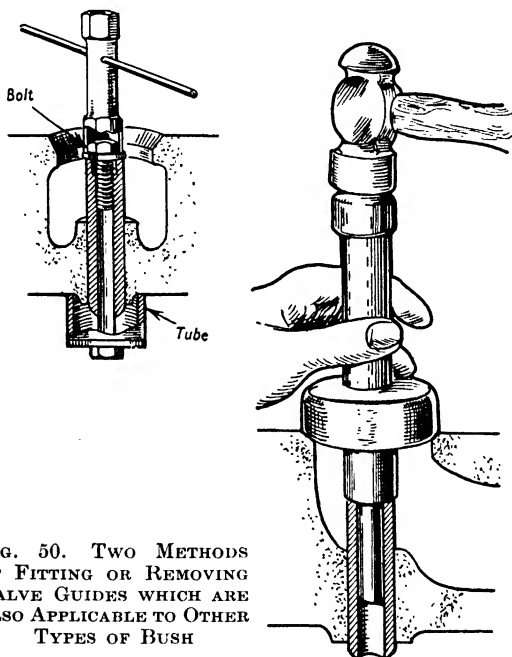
TWO METHODS OF FITTING OR REMOVING VALVE GUIDES WHICH ARE ALSO APPLICABLE TO OTHER TYPES OF BUSH
